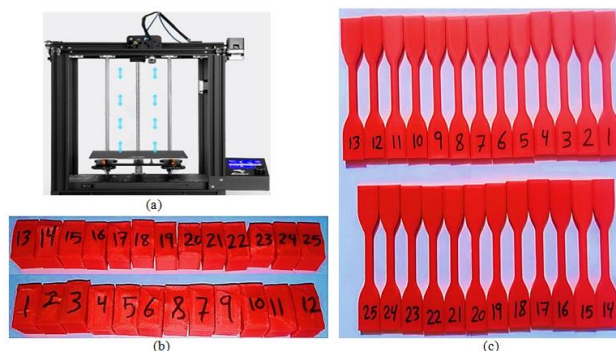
Test specimens printing process, (a) Creality Ender-5 Pro 3D printer, (b) compressive specimens, (c) tensile specimens
